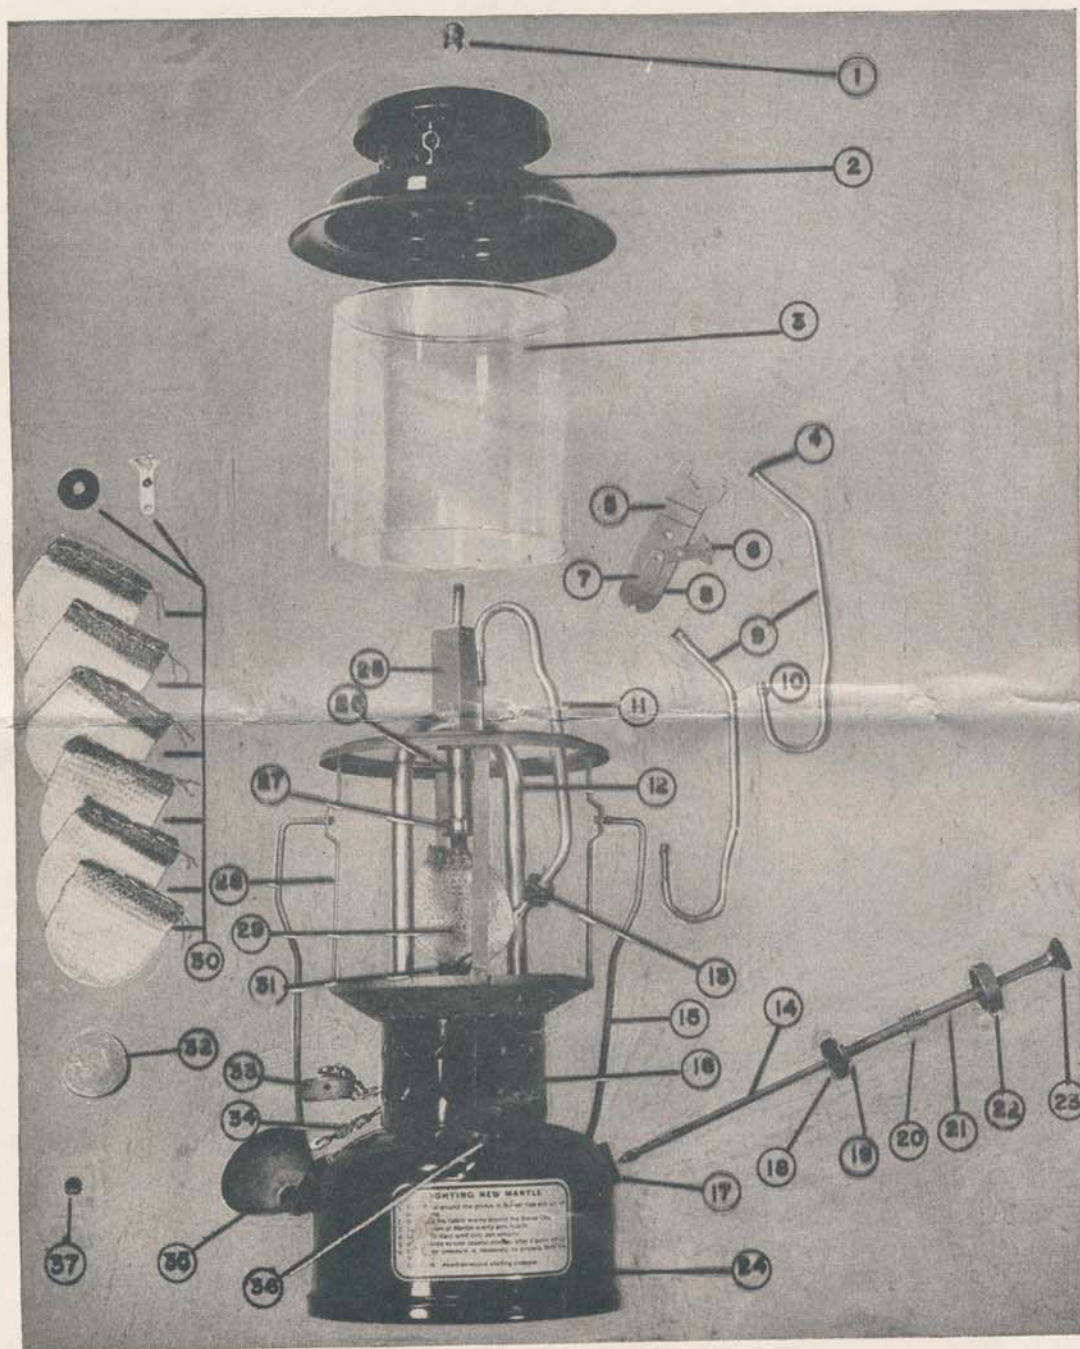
Lantern, gasoline, leaded fuel (exploded view with spare parts).
